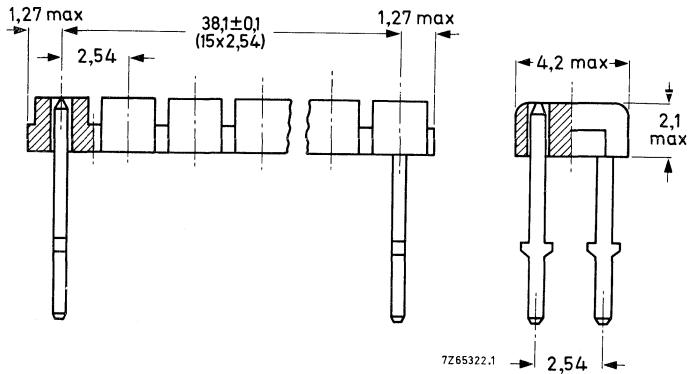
Removable mounting strip with 2 x 16 contact pins. For pin dimensions see Fig. 2.
